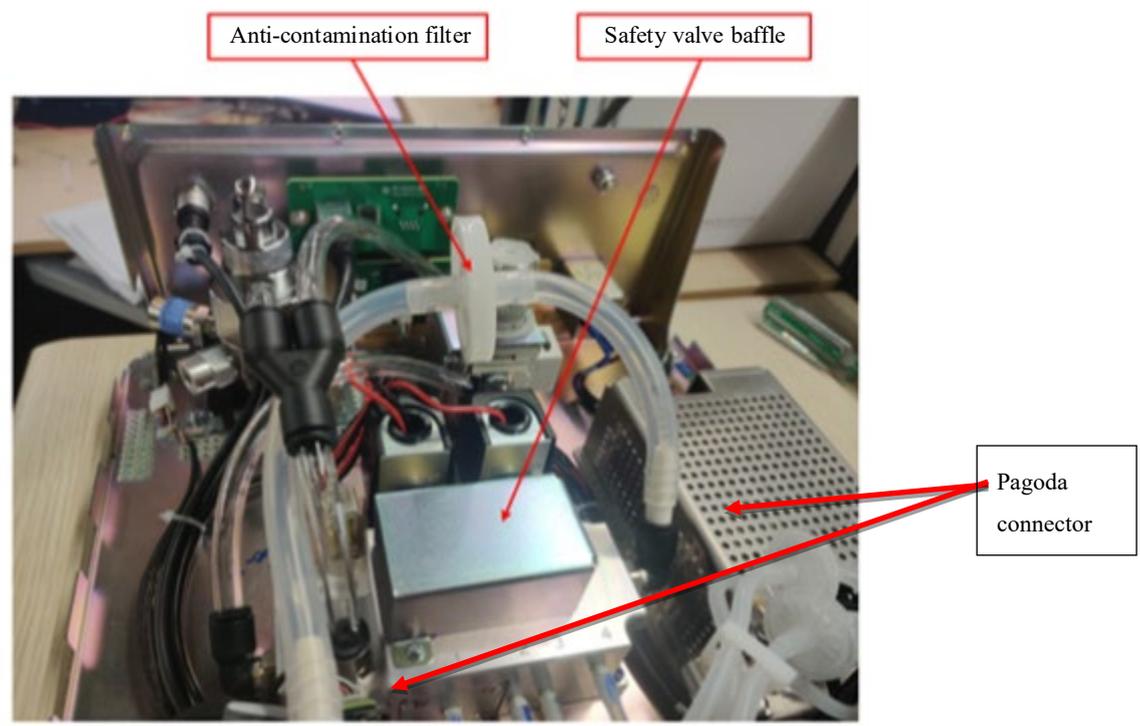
Disassembling the Anti-contamination Filter Assembly
